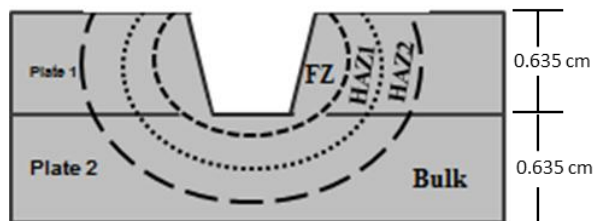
Schematic of weld zones, specifying the FZ and HAZs. Far enough away from the weld zone, the sample will become unaffected base material. All samples were welded through a 45° countersunk hole in order to have full penetration through both plates.
